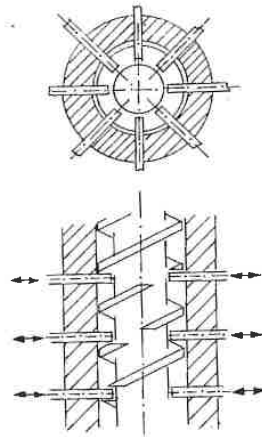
Pin barrel extruder (Quer Strom Misch Extruder).
